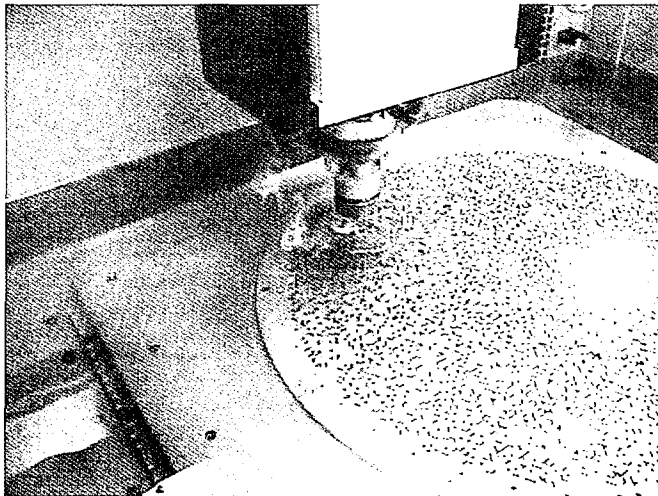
Cutting of the JEM-X code by Electrodischarge wire machining. More than 5000 hexagonal holes 3.3mm side to side.
